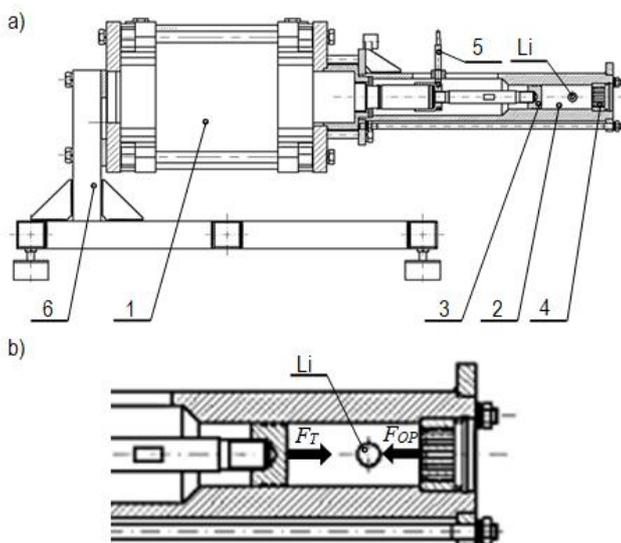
The working unit of dry ice agglomeration. (a) test stand and (b) compaction assembly: 1 – pneumatic piston, 2 – working chamber, 3 – compacting piston, 4 – multi-channel die, 5 – displacement sensor grip, 6 – frame. Li, —liquid inlet
